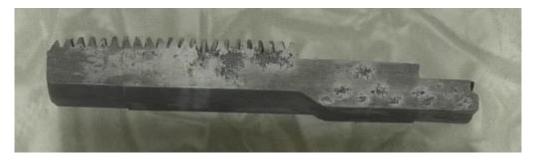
Pitting corrosion on machined surfaces of the corrosion sample after 19 month exposure to gas number 3. Similar corrosion was observed at samples exposed to gas number 6.
